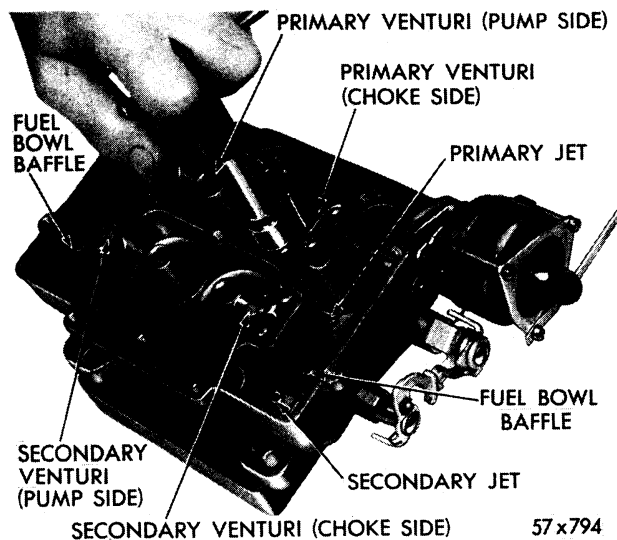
Removing or Installing Main Metering Jets (Primary)
